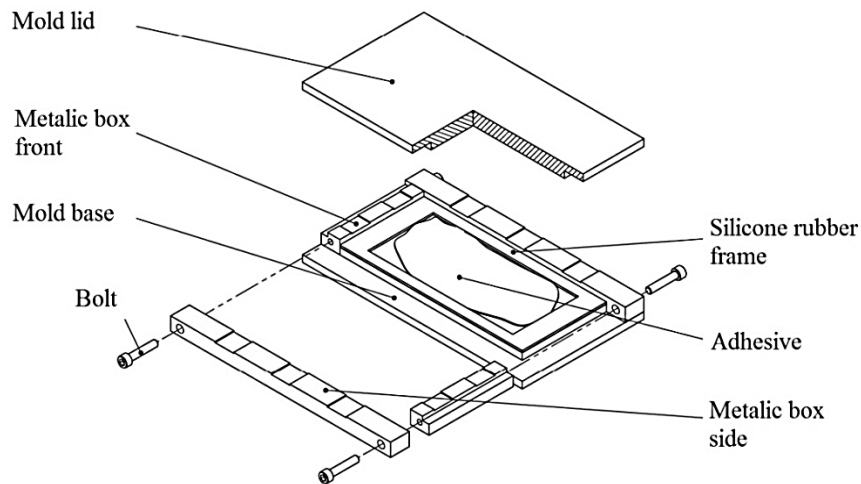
Exploded view of the mold to produce plate specimens under hydrostatic pressure.
